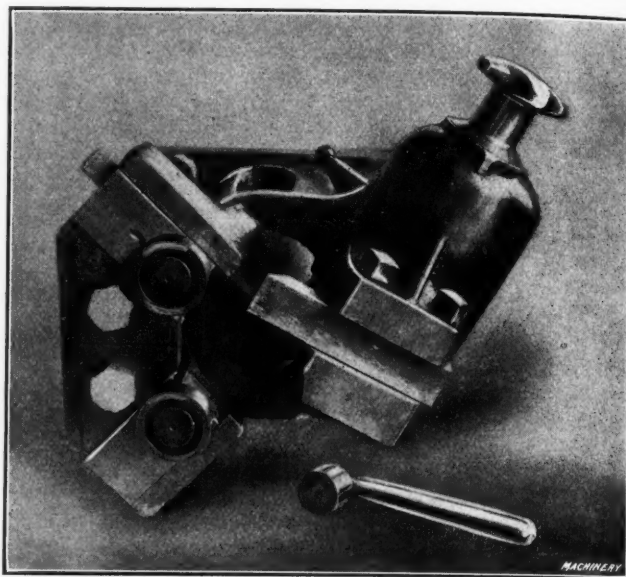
Box-type of Turning Tool for the "Libby" Turret Lathe
